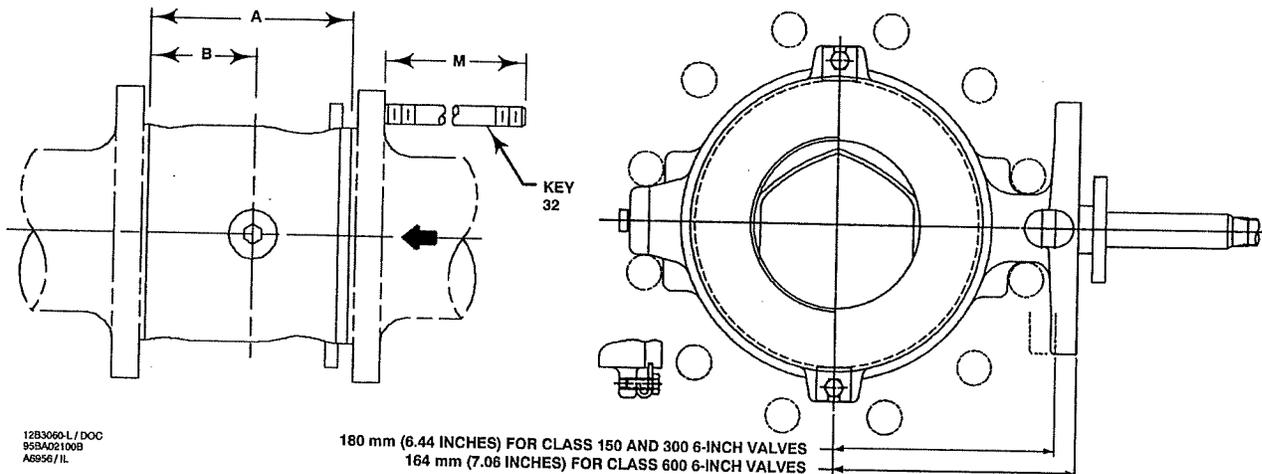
Design V200 Dimensions and Required Clearances for Installation
